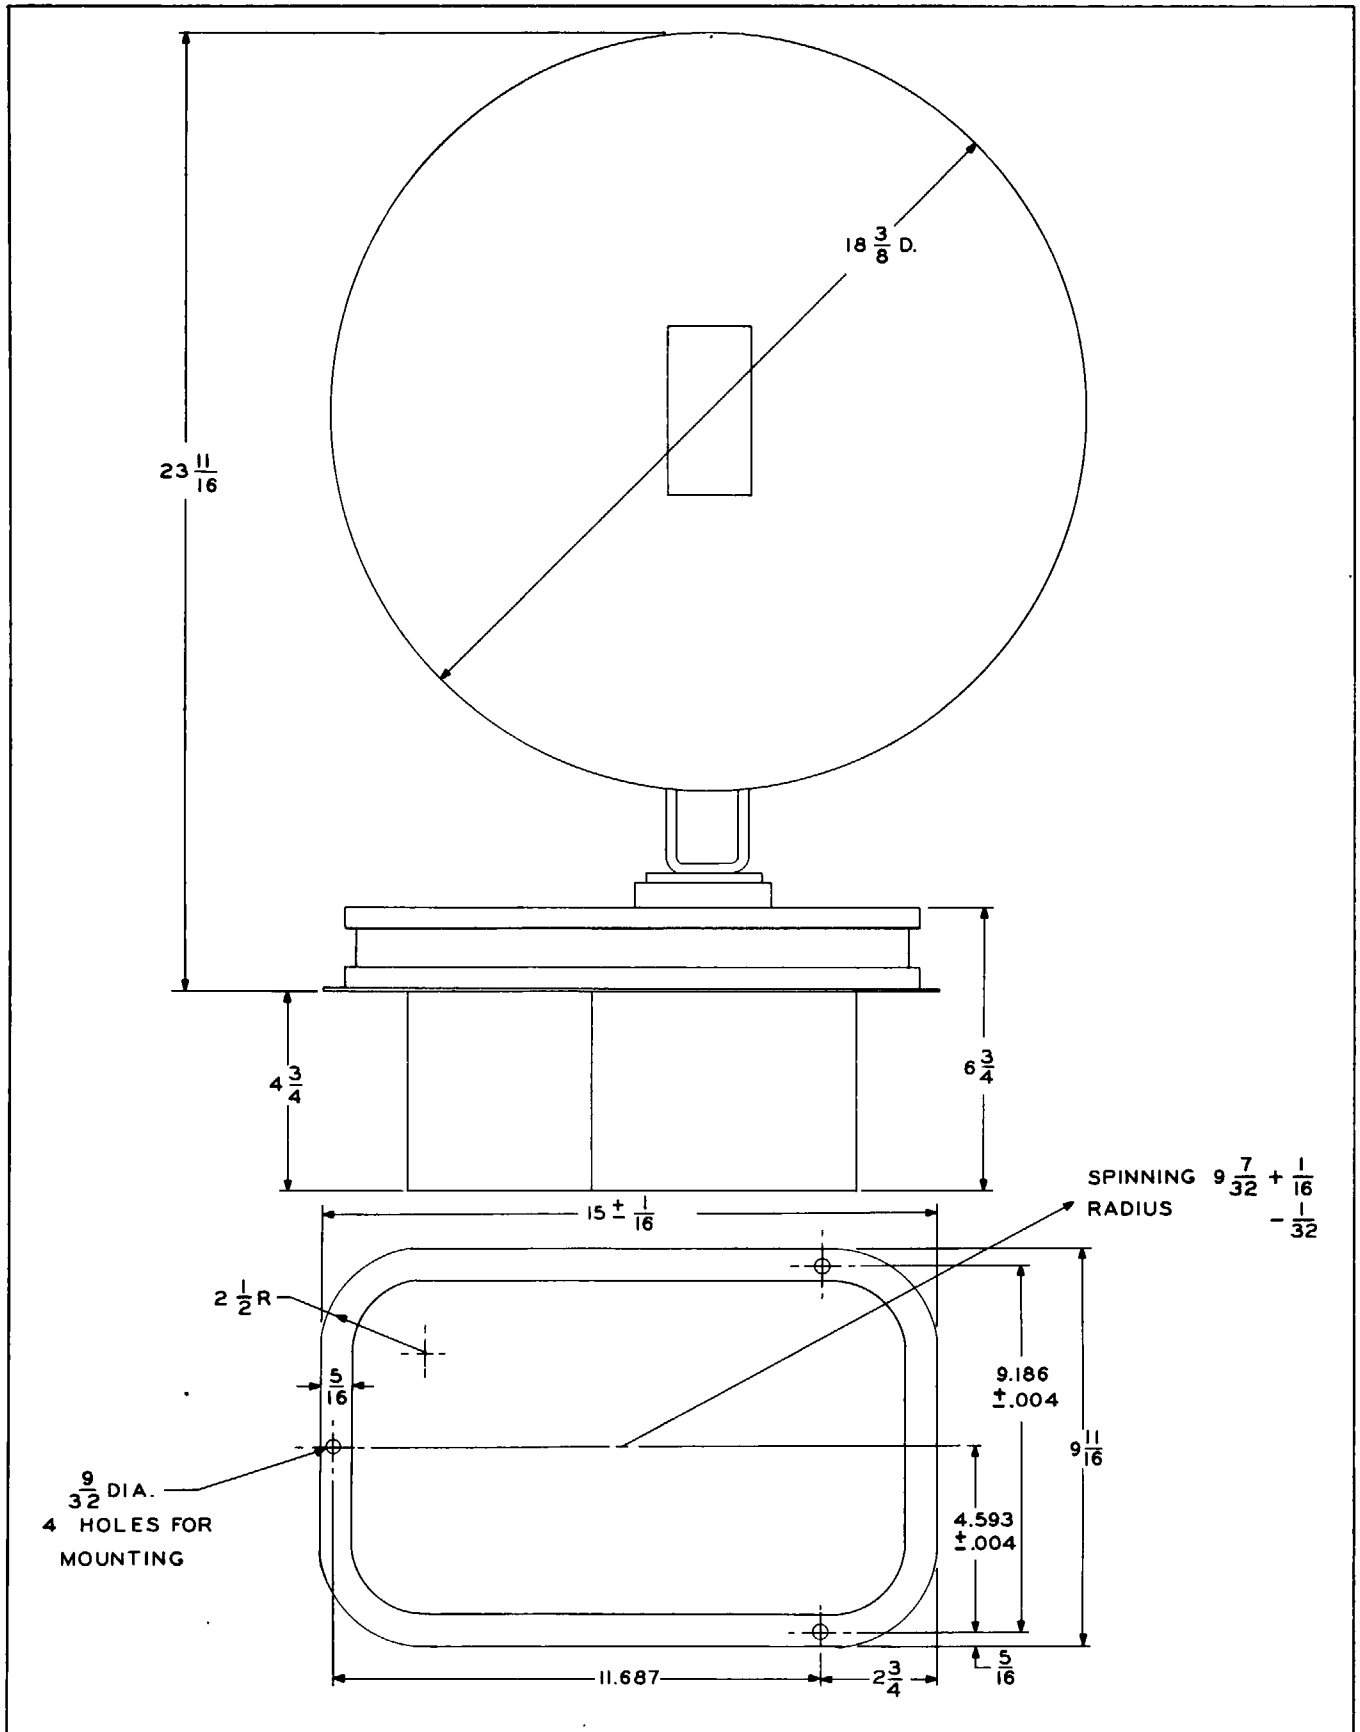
Antenna Assembly AS-154/APS-10—Simplified Installation Drawing
